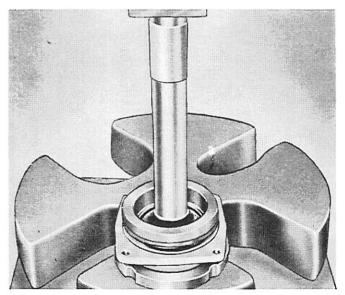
Installing End Cap Roller Bearing Section II - Powerhead Master Service Manual
